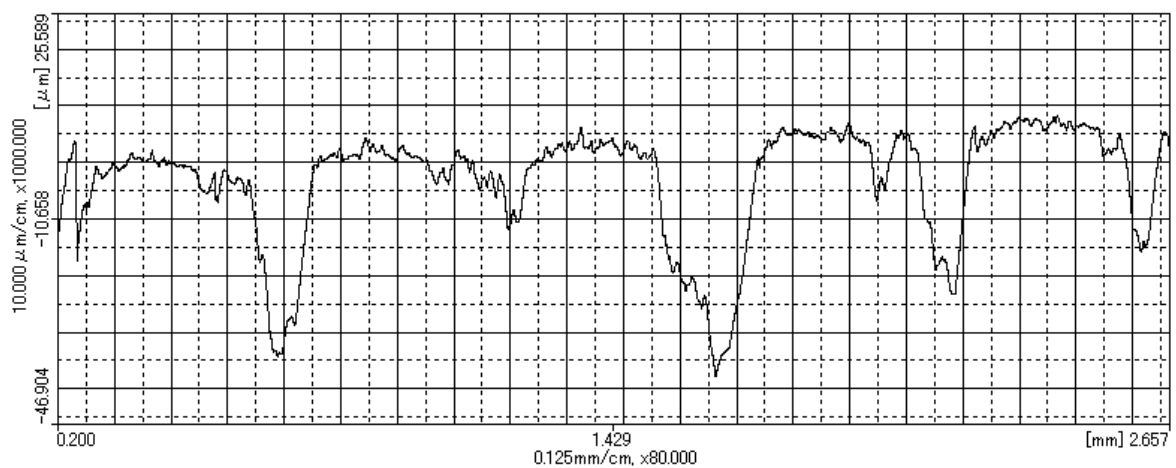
Finish surface parameter (machined with Tool No. 1 (Helix angle  $0^\circ$ )) (Down cut method)
